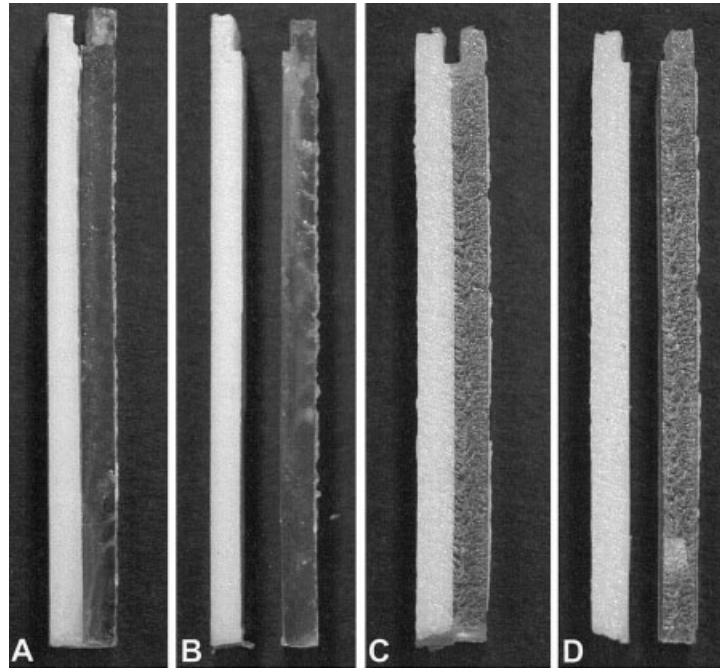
PCL/PS (A, B) and EBU/PS (C, D) welded specimen, before (A, C) and after (B, D) ADCB tests.
